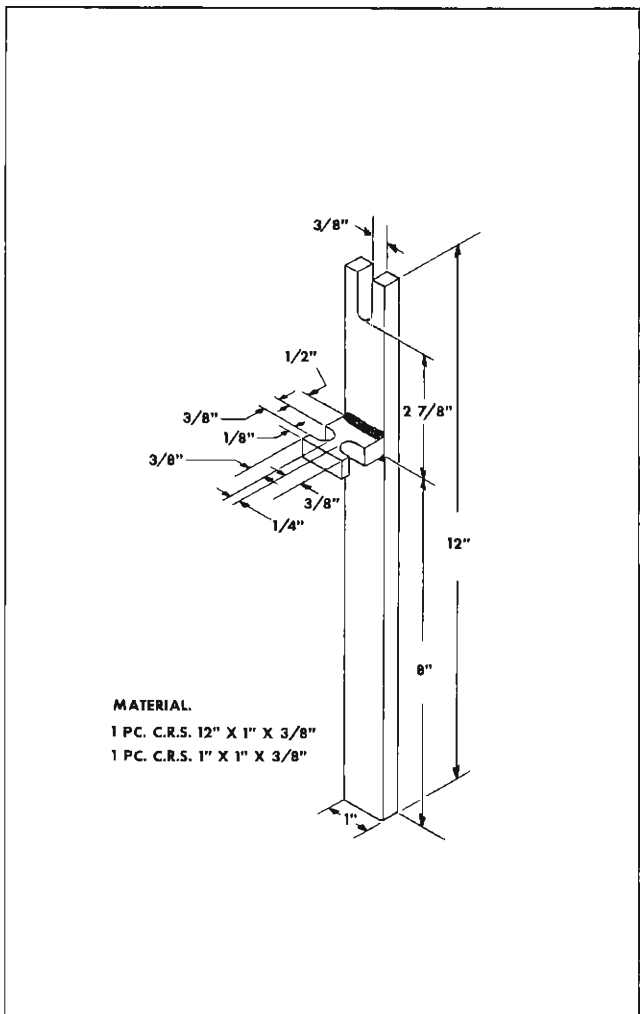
Torque Rod Adjustment and Remover Tool
